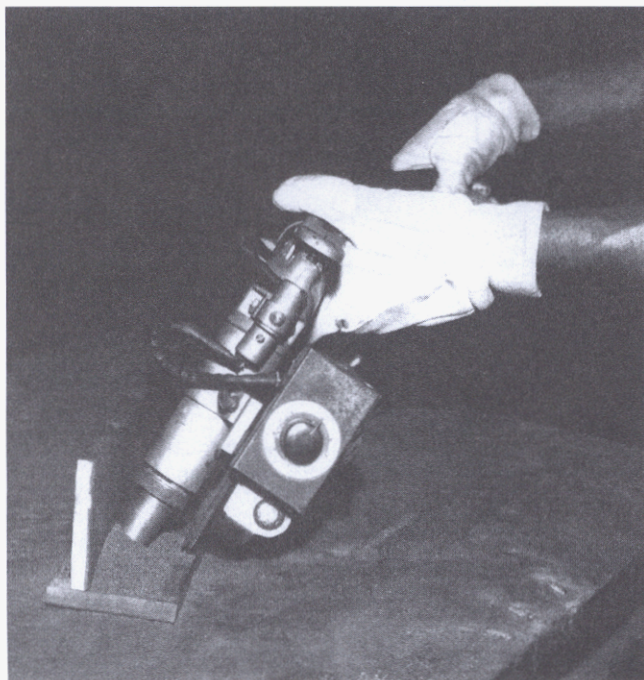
Hand-Held Submerged Arc Welding Gun. Note Flux on Plate.
